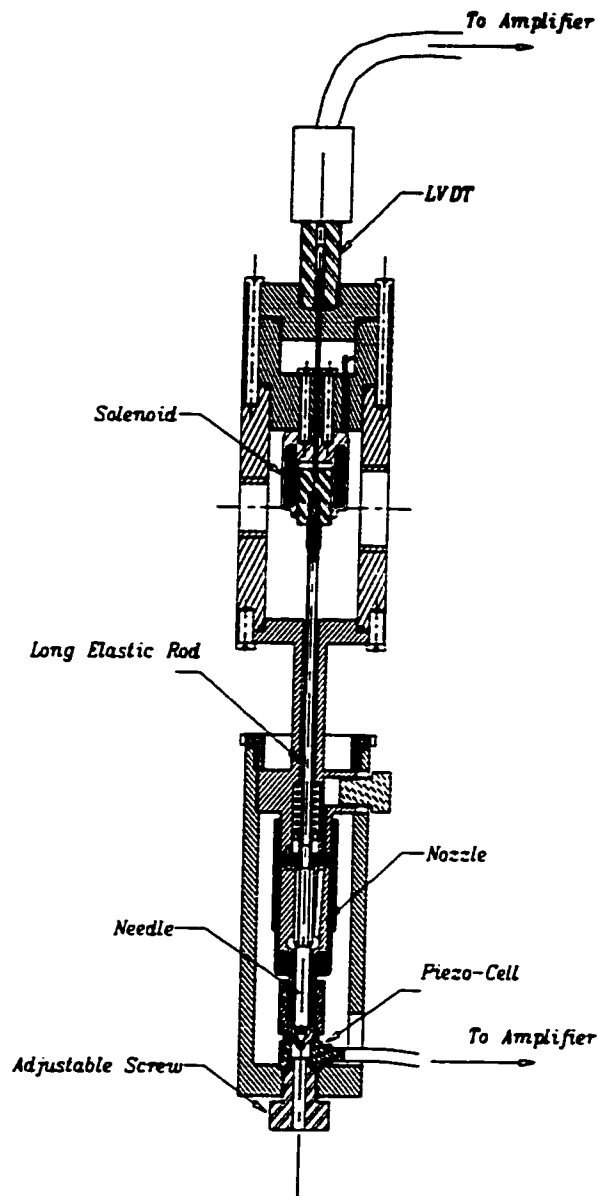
Experimental Setup Equipped With Piezo Cell And LVDT
